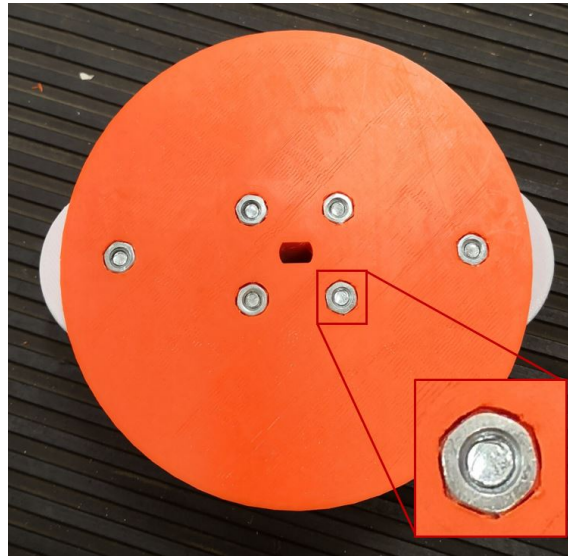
Photo showing the close-up view of the clearances of the top part of the roller housing for the shaft coupler and roller housing screws
